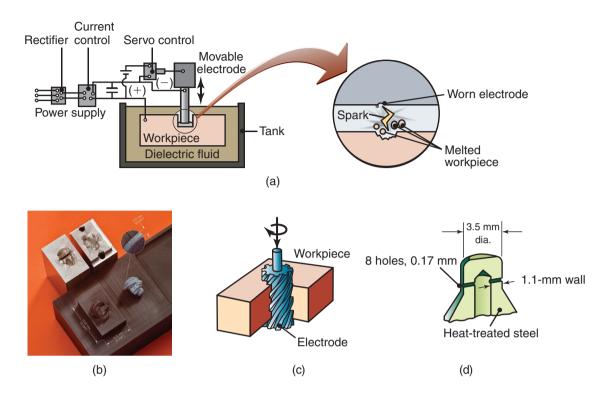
(a) Schematic illustration of the electrical-discharge machining process; this is one of the most widely used machining processes, particularly for die-sinking applications. (b) Examples of cavities produced by EDM, using shaped electrodes. The two round parts (rear) are the set of dies used in extruding the aluminum piece shown in front (see also Fig. 15.9b). (c) A spiral cavity produced by EDM using a slowly rotating electrode similar to a screw thread. (d) Holes in a fuel-injection nozzle made by EDM; the material is heat-treated steel. *Source:* (b) Courtesy of AGIE USA, Ltd.
